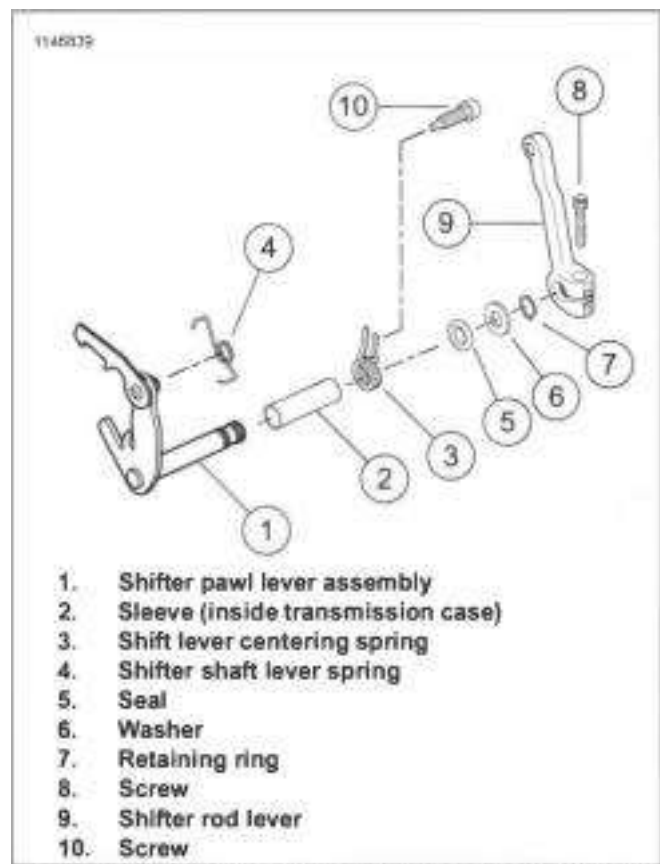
Shifter Arm and Pawl Assembly (Typical)
